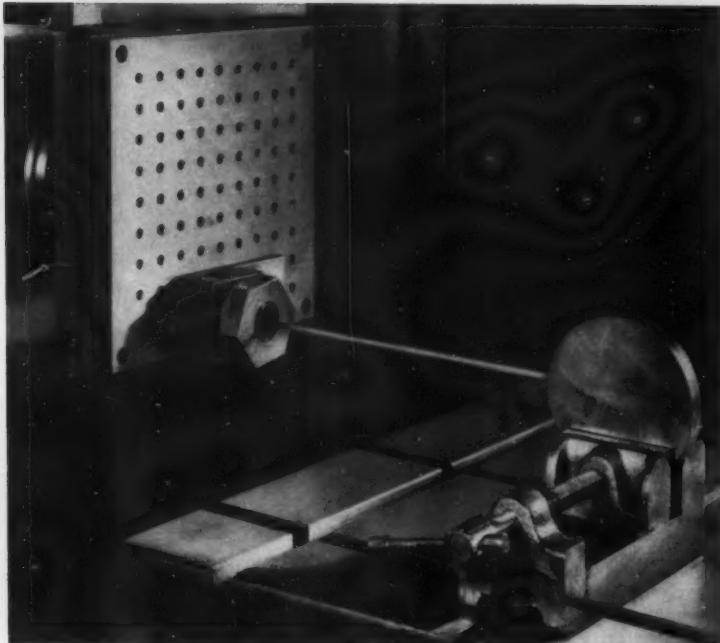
Work-piece mounted in vise on the work-table of machine shown in Fig. 1, with the electrode in place on the face of the drive-ram
